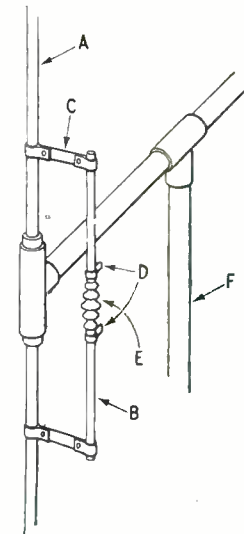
Perspective sketch of the T-matching section; A = aerial rod, B = matching rods, C = brass supporting strips, D = cable-connecting clips, E = insulator, F = upper part of mast section.
